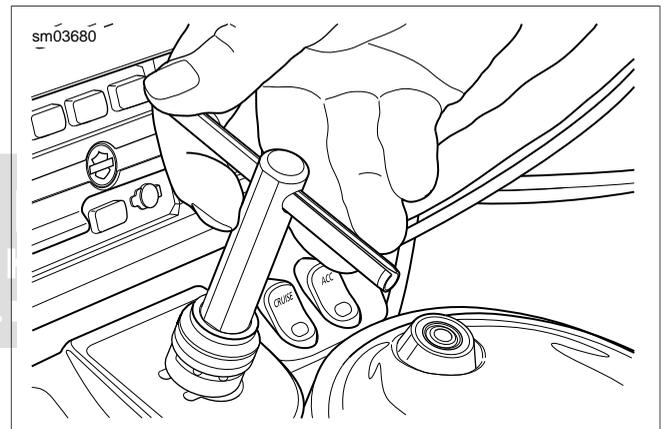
Bottom Alignment Tool in Threaded Post and Rotate to Desired Position
